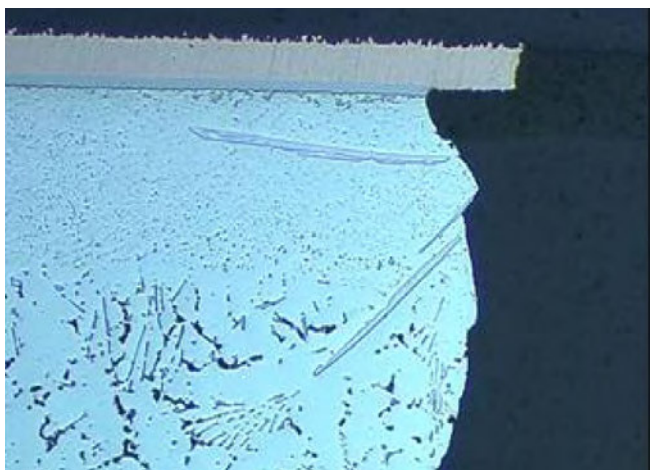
Large Ag3SnSilver/Tin IMC structures in a mixed metallurgy solder joint^[9].
